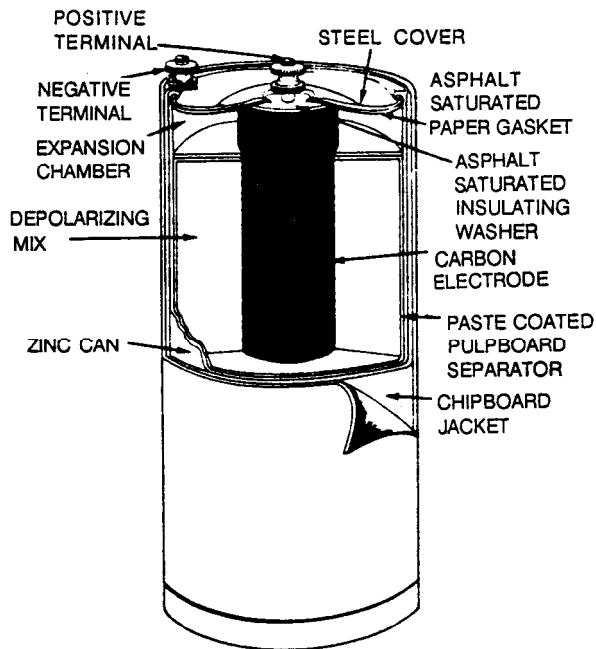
Cutaway View of the General-Purpose Dry Cell.
